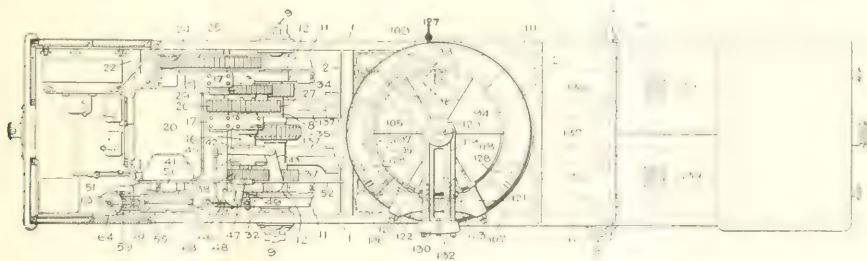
PLAN VIEW OF TOWING LOCOMOTIVE WITH COILERS REMOVED.
